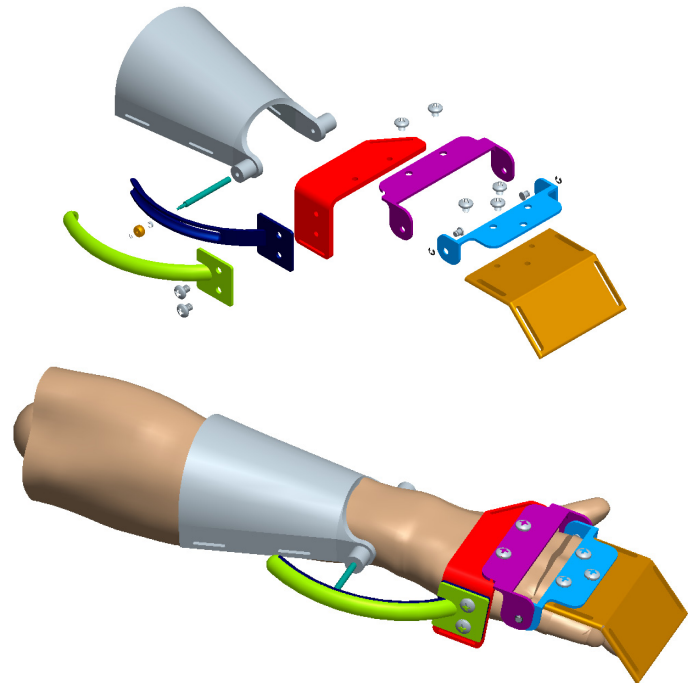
Exploded View of the Mechanical Design and an Example of a User's Right Arm and Hand Integrated with the Robotic-Assist Exoskeleton
